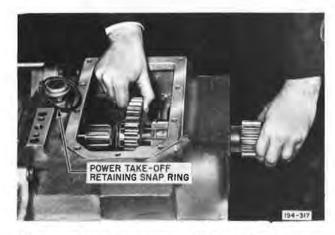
Installing P. T. O. Gear on Rear Countershaft
